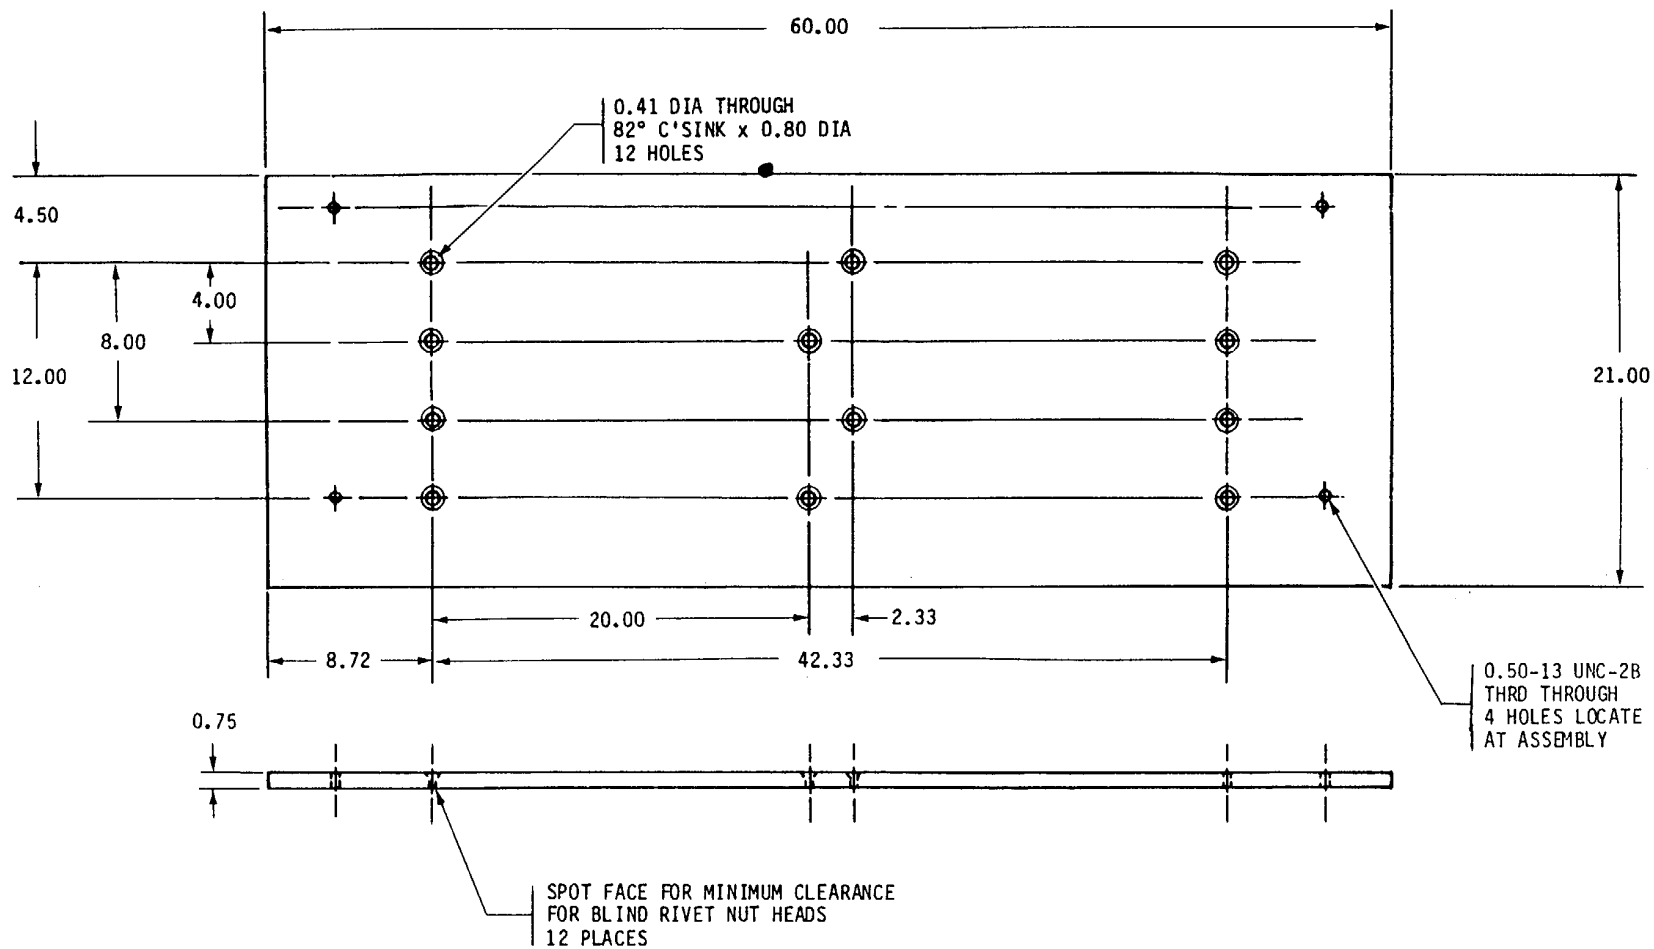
Dimensions for lathe mounting plate, 11021199, unit 2, ISO-2-1.
